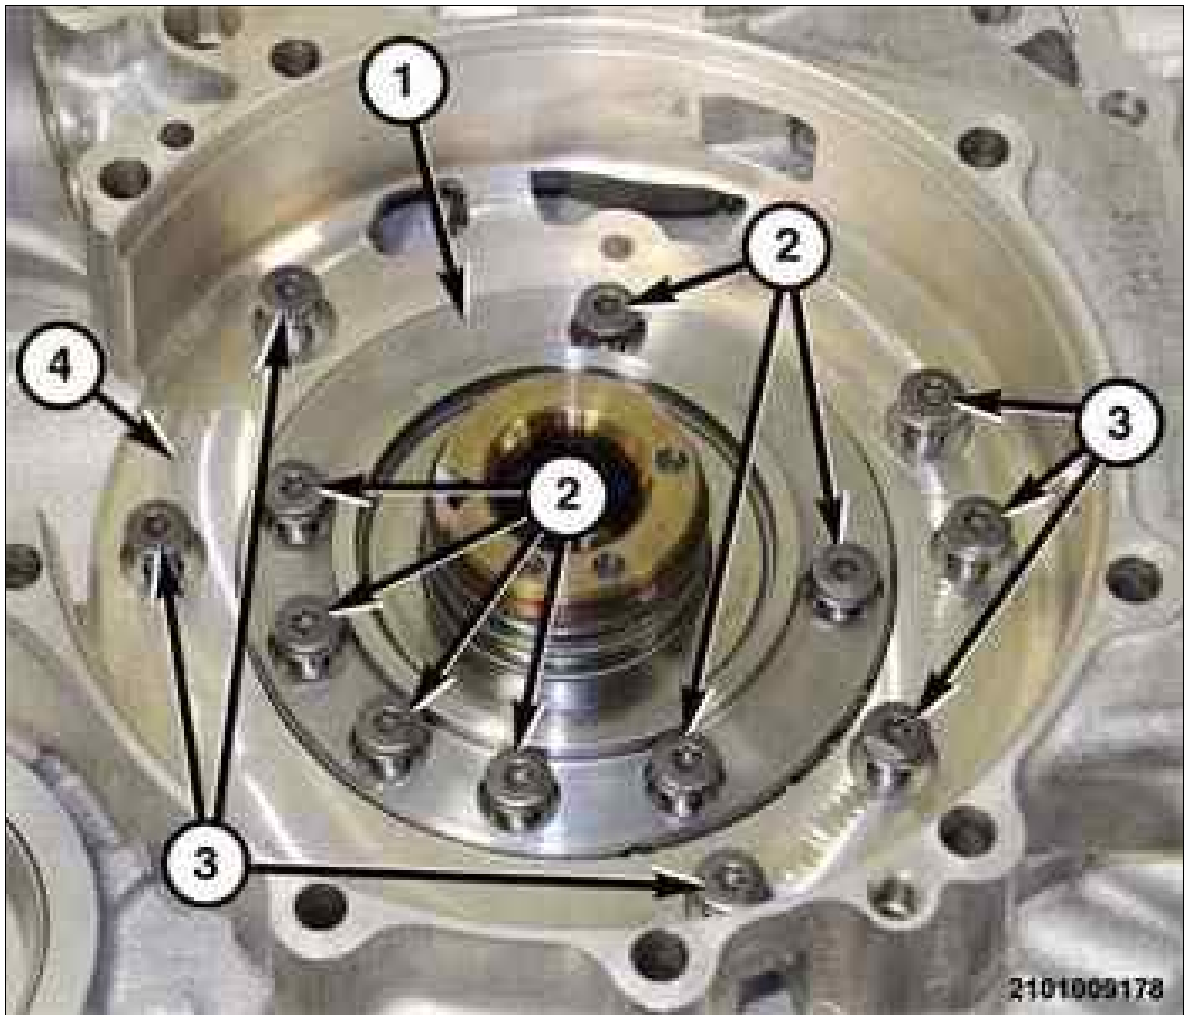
Removing/Installing Intermediate Support Plate And Oil Pump
